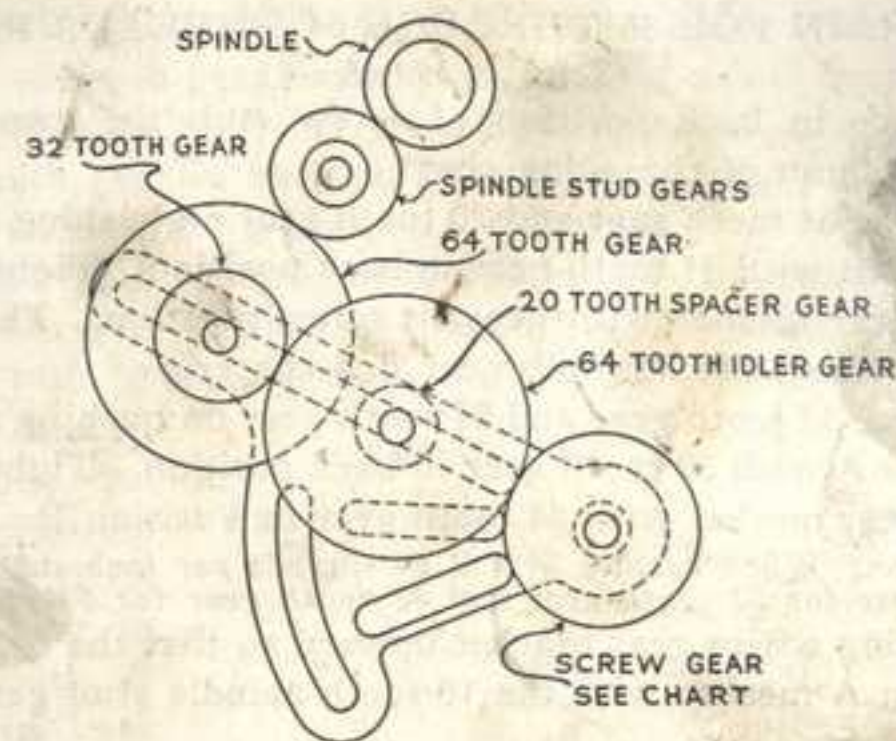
Gear set-up for 18 through 32 threads per inch.
